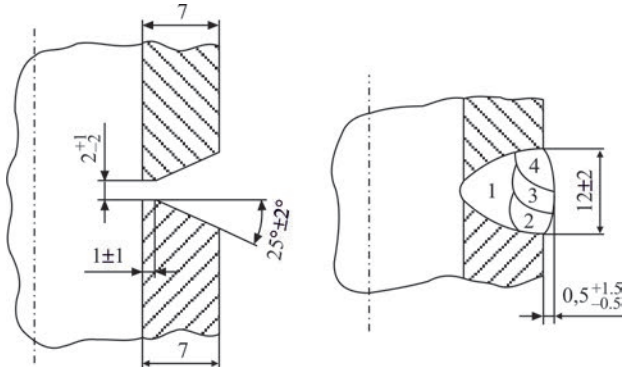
Preparation of edges of U-type for the welded pipe joint (SMAW) (a), arrangement of the weld passes (b)
